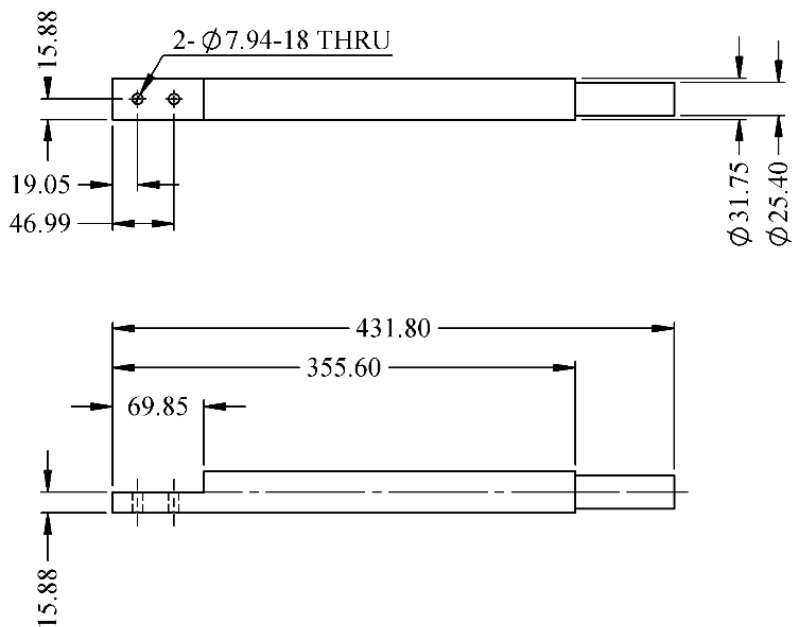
SLJ fatigue test fixture (all dimensions in mm)
